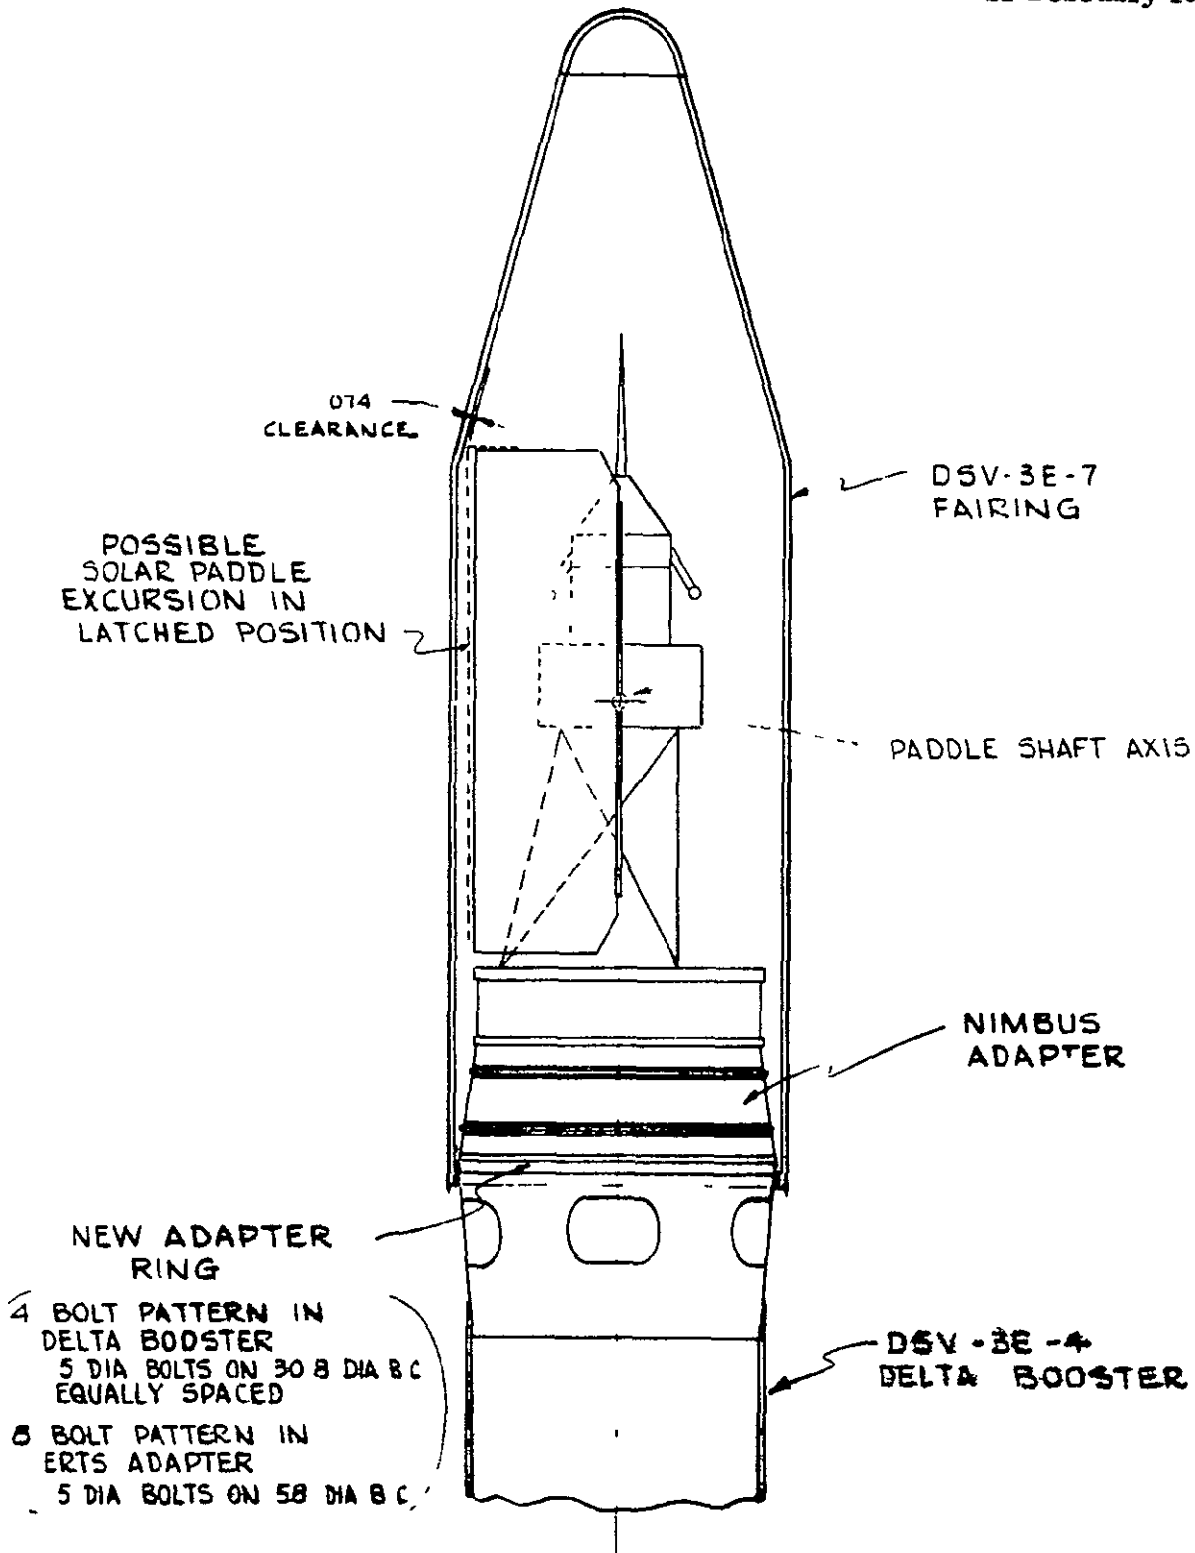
Paddle Assembly Protrudes into Conical Portion of Shroud
